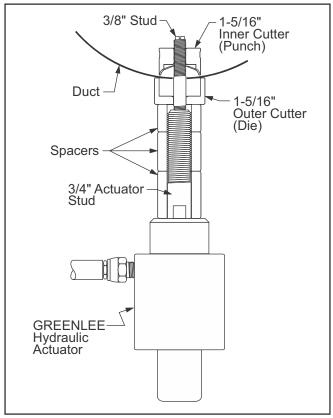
1-5/16" Hydraulic Punch Configuration
